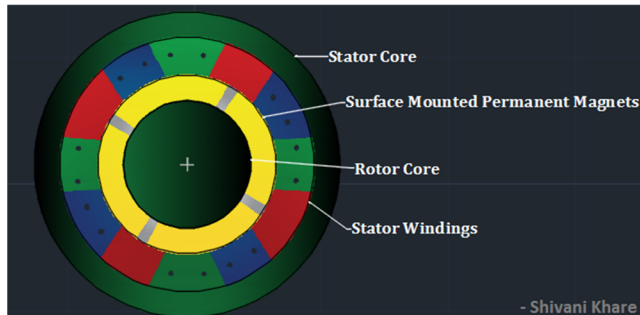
Surface-Mounted permanent magnet synchronous motor design
